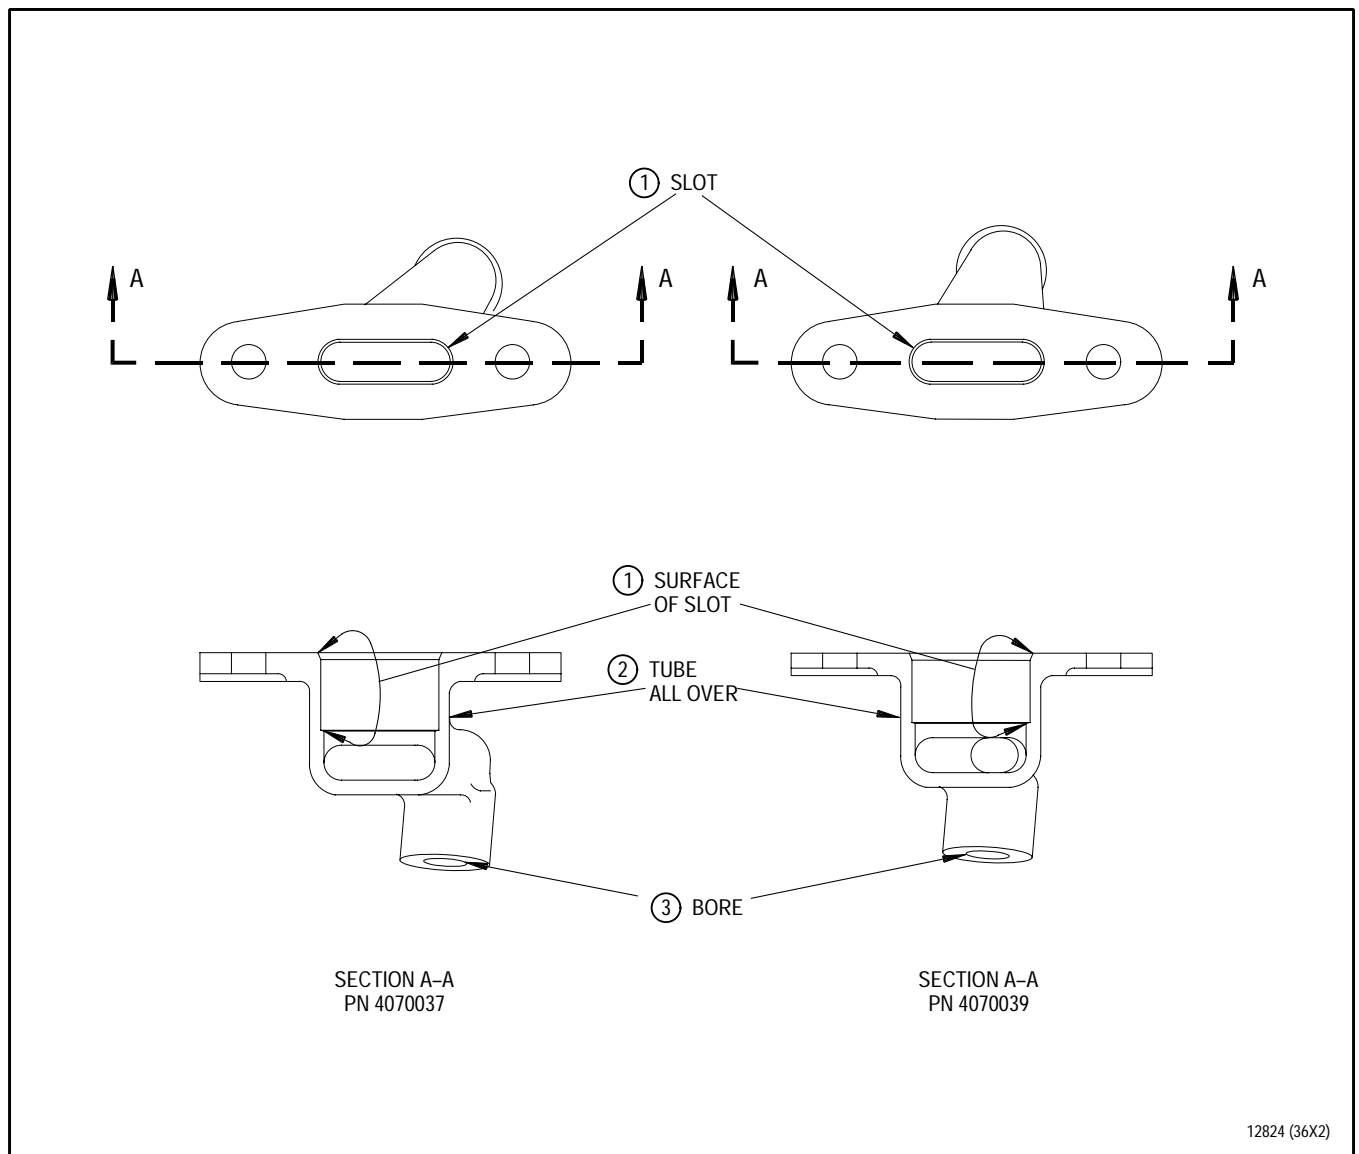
No. 2 and 3 Bearing Pressure Tube - Inspection
